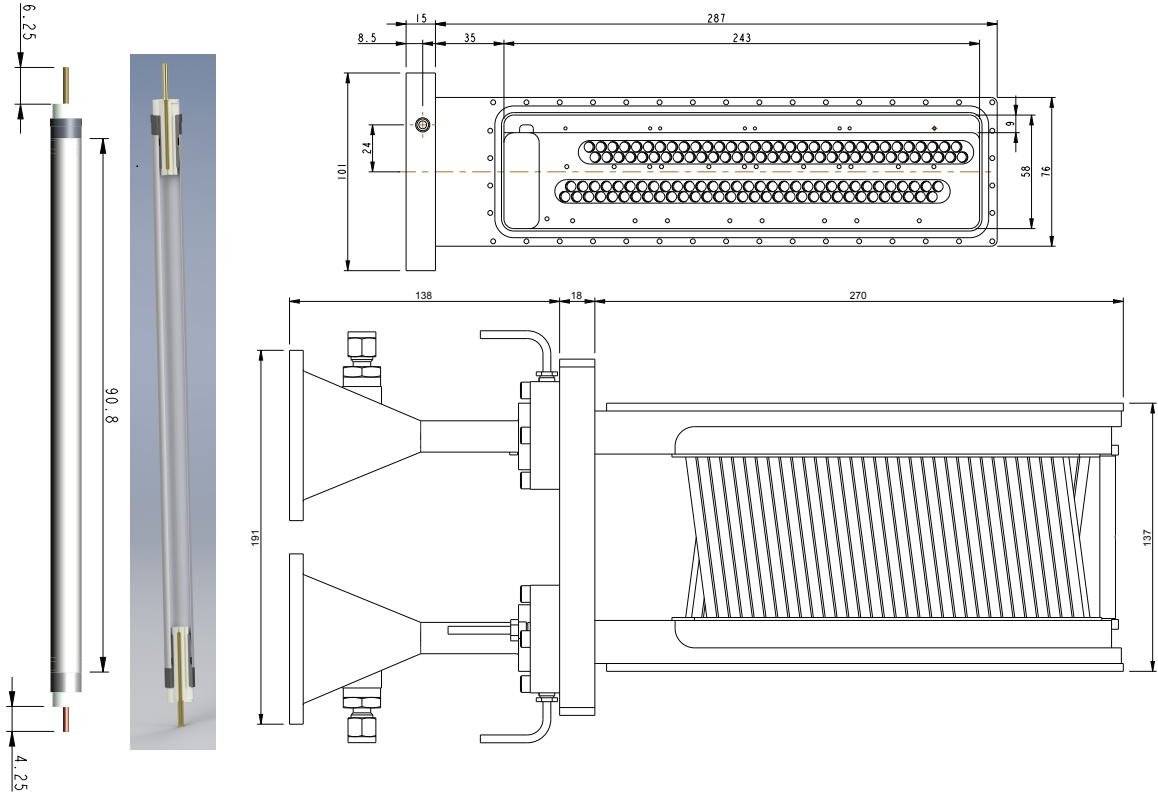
Left*: Engineering drawing showing a built straw with a cut through render of a built straw for comparison. *Right*: Engineering wireframe drawings showing a manifold as well as a fully constructed straw tracker module.
